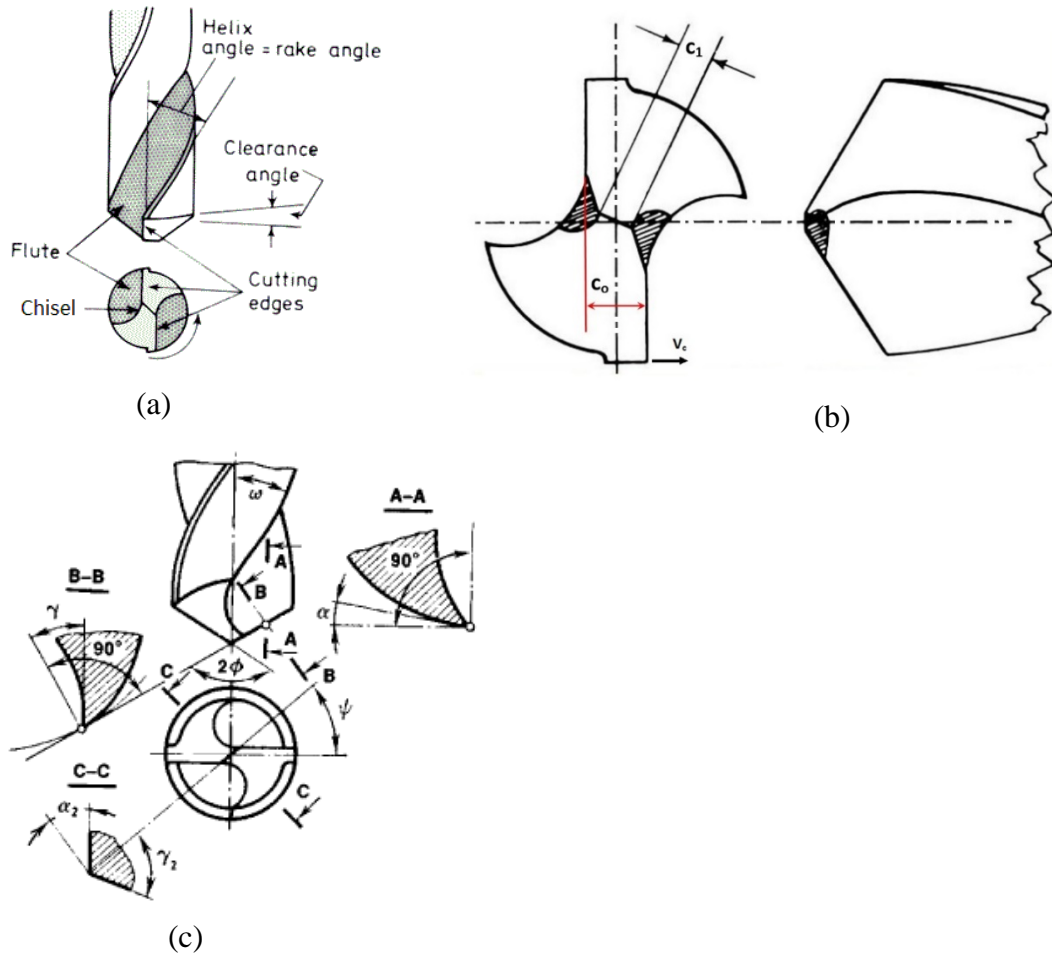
Parts and angles of a twist drill (a), thinning of chisel (b) and cutting view of a twist drill bit (c) [22].
